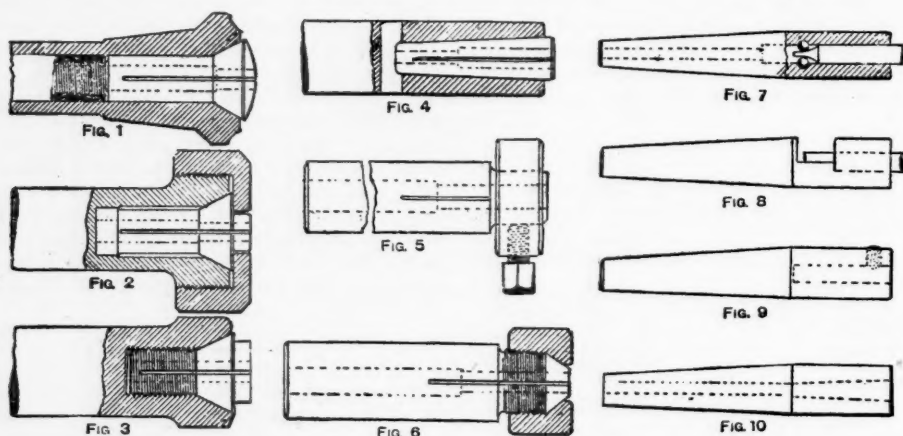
is a common form of hollow spindle chuck, with draw in spindle engaging from the back, this being undoubtedly one of the readiest, truest and most secure means for holding this class of tool. Where the use of the draw spindle is impossible or inconvenient, however, a modification of this chuck becomes necessary. Two methods are shown at Figs. 2 and 3. Although somewhat more bulky than the others, that shown at Fig. 2 is an excellent device, and its value increases if the tool to be used are of various sizes. The inserted spring collet—not the simplest part to replace—having no threads, lasts a long time. This cannot be said of either of the devices shown at Figs. 1 and 3. In both cases a stripped thread would give a lot of trouble, while one worn chuck, if sets are used, may cause complications necessitating the making of a new screwed spindle and perhaps chucks as well.
